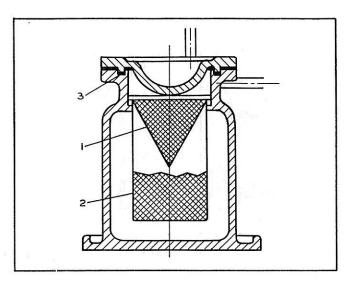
Oil Filter, Y-15 Type - 9" and 10" Compressors
